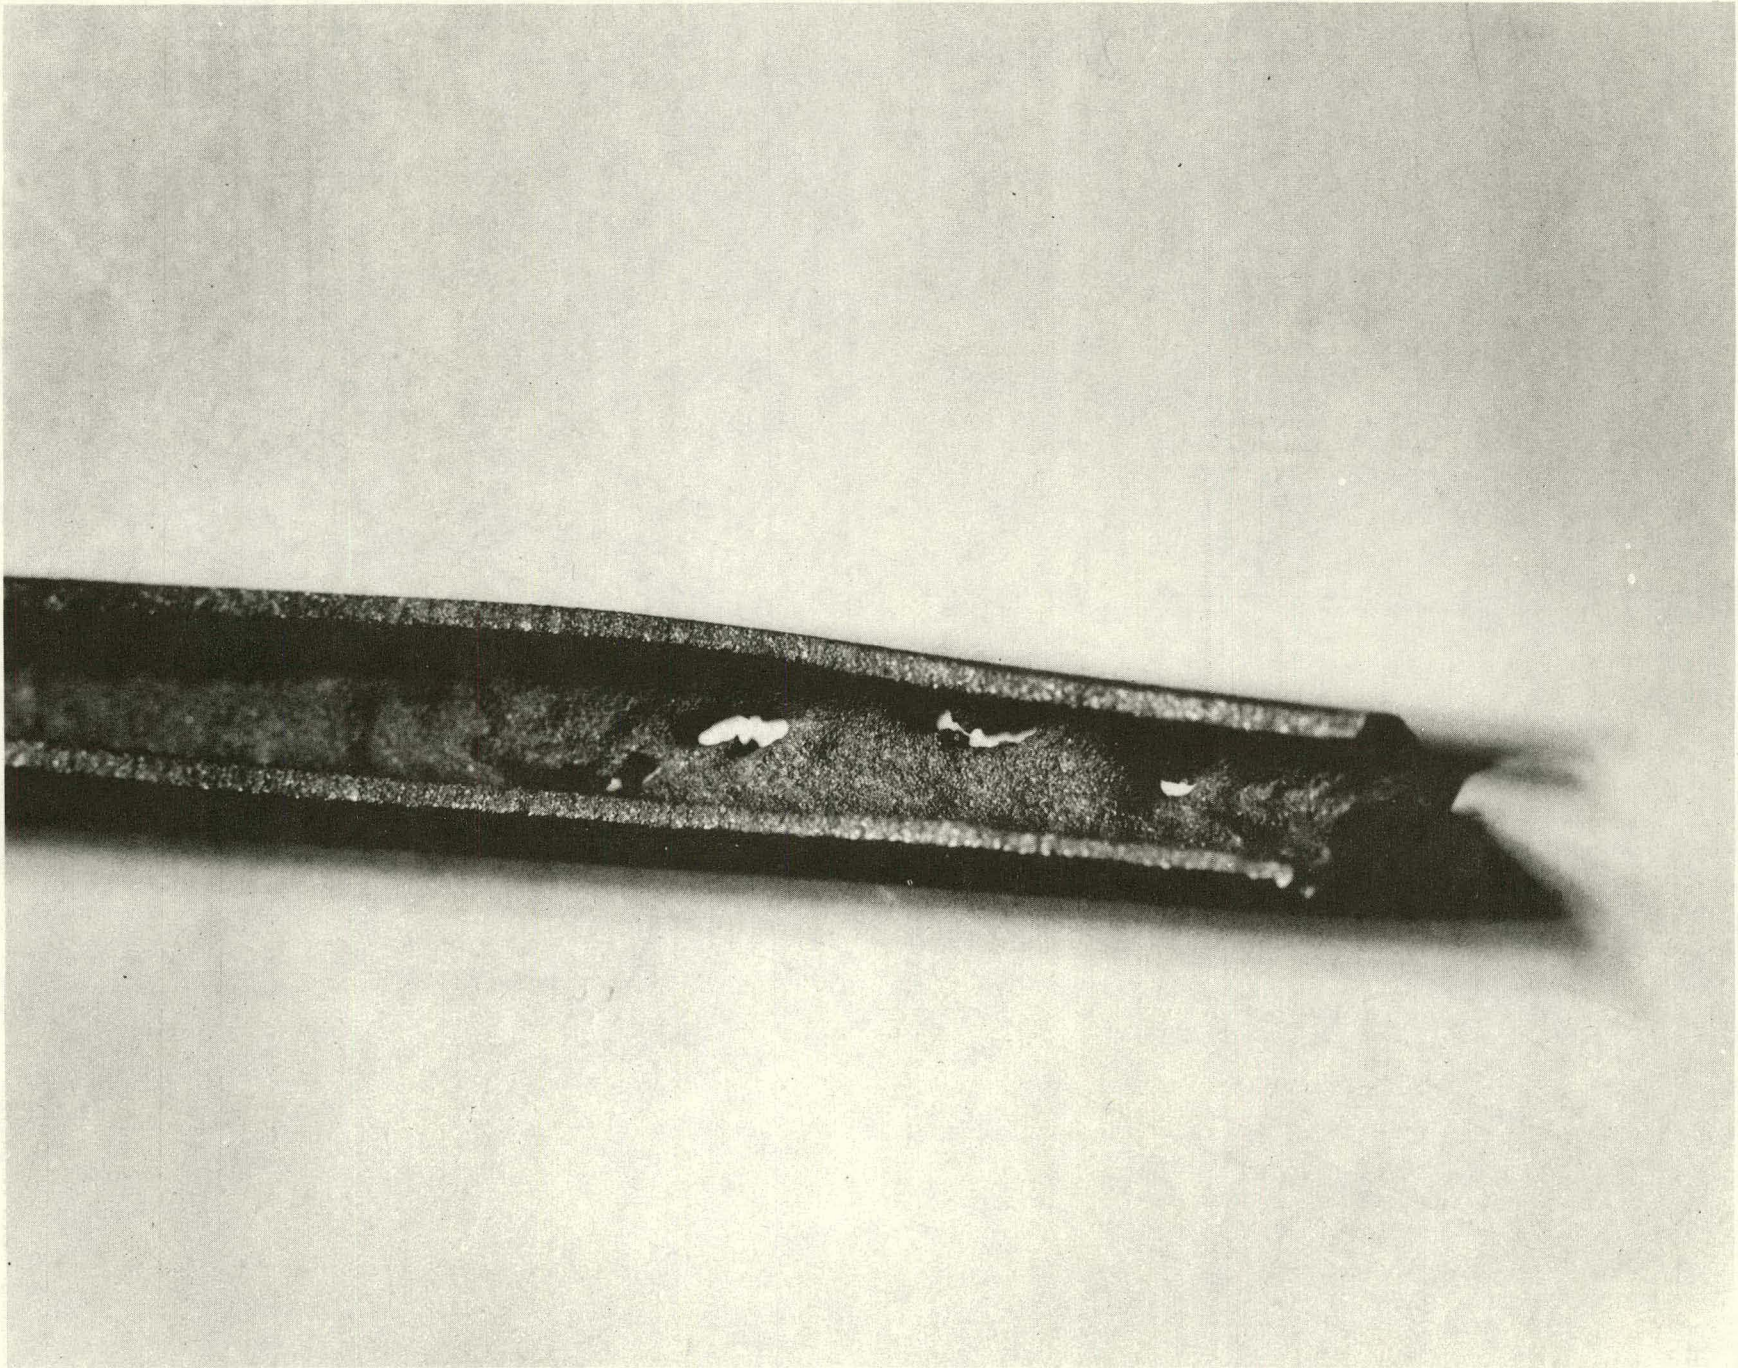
Corroded cooler tube showing holes (left side, 7A, first stage)
